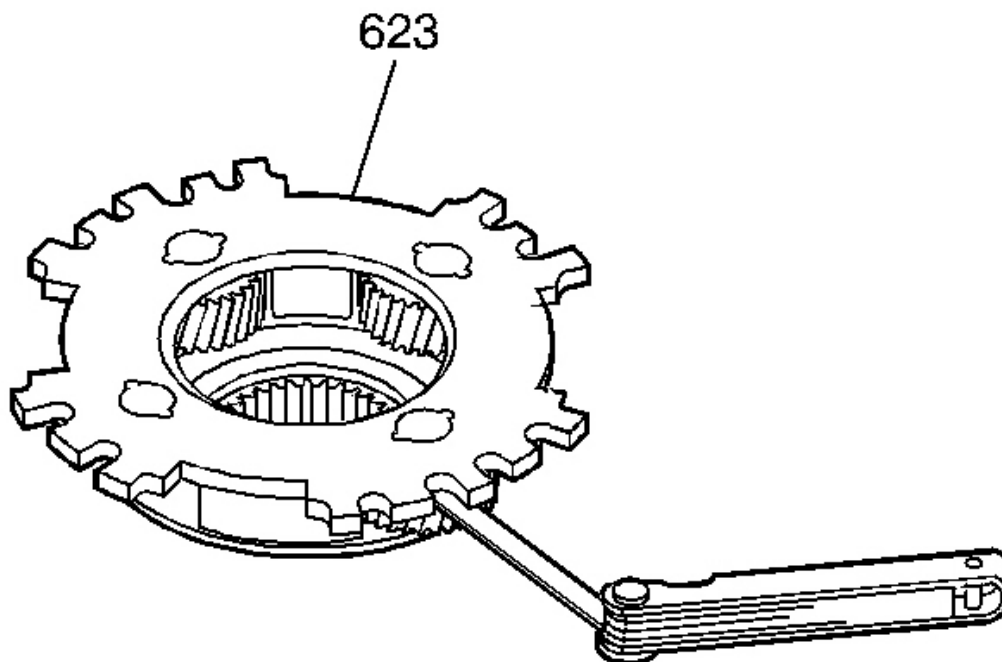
Measuring Planet Pinion End Play With Feeler Gage
